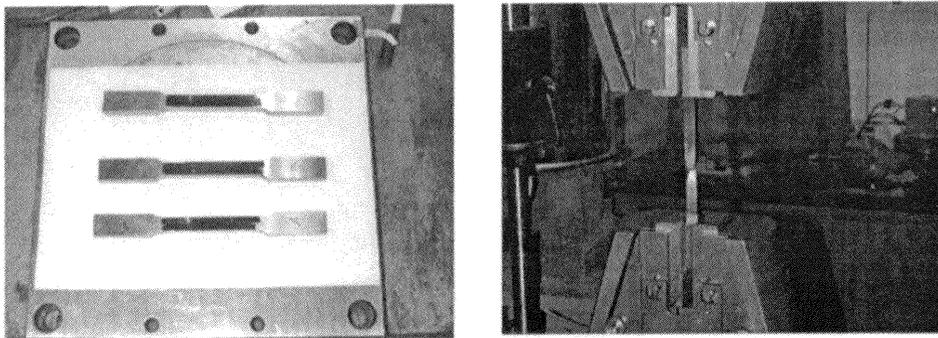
Tension test specimens fabricated by 3D Welding and Milling
